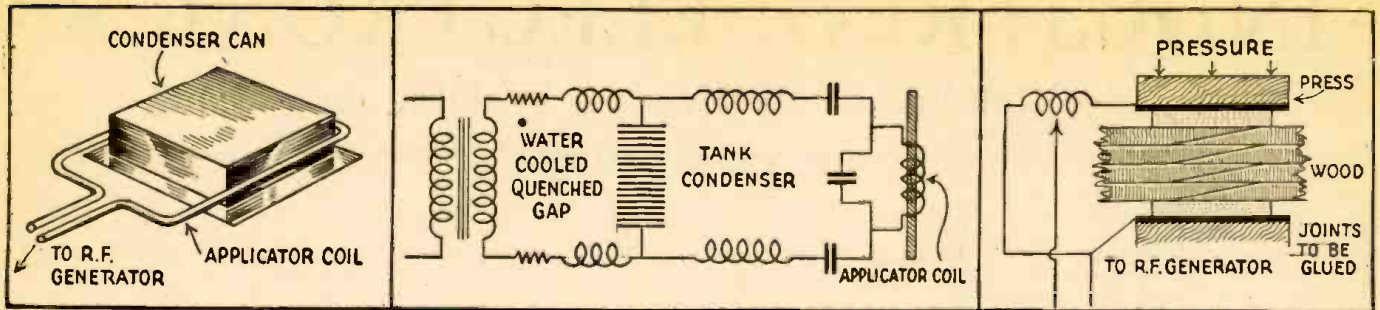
H.F. heat solders condenser cans. Fig. 5—A quenched-gap type of H.F. heater. Fig. 6—A set-up for H.F. gluing of plywood.
